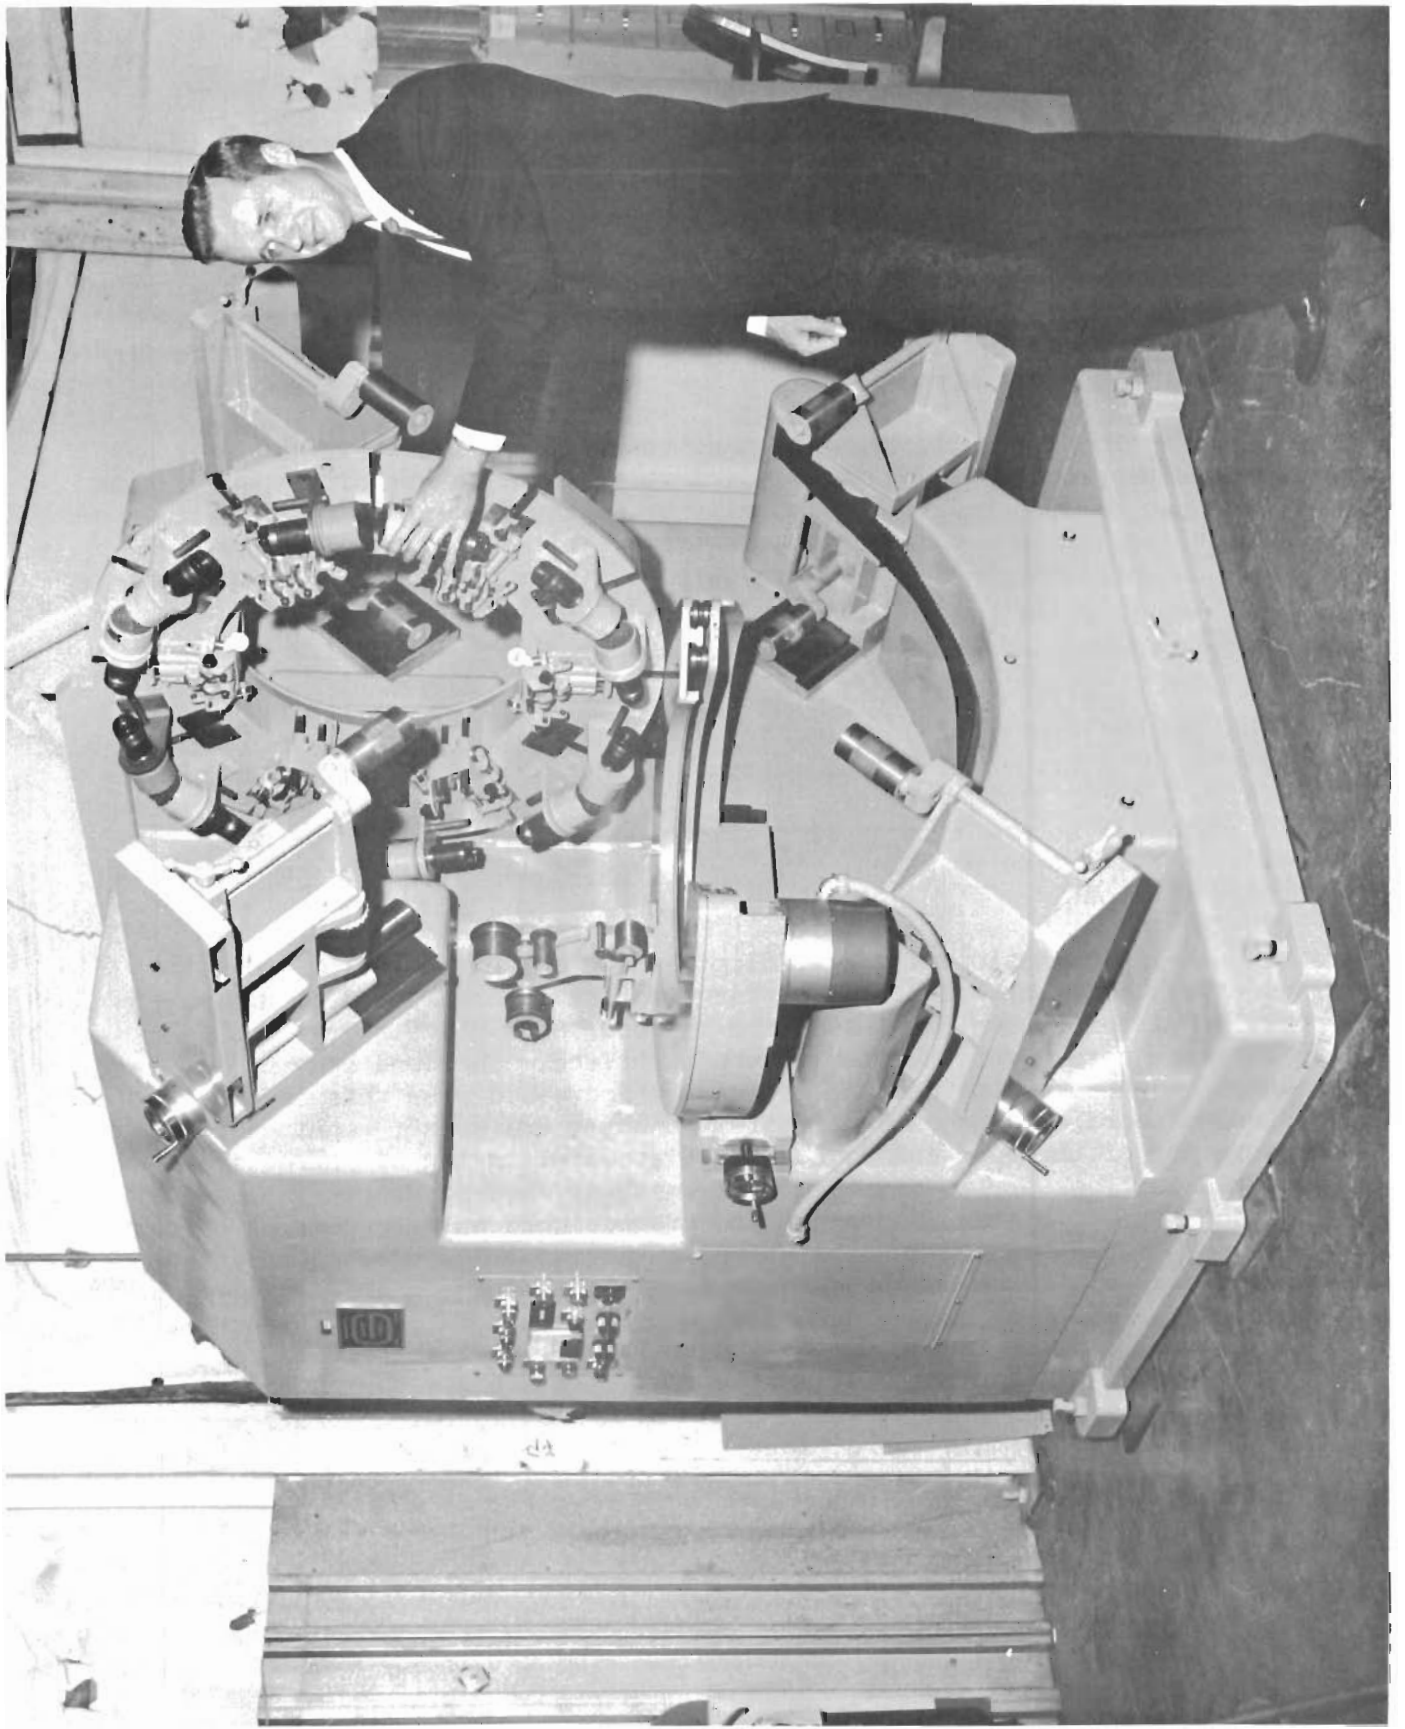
Prototype 49 x 17 Tire-Winding Machine
